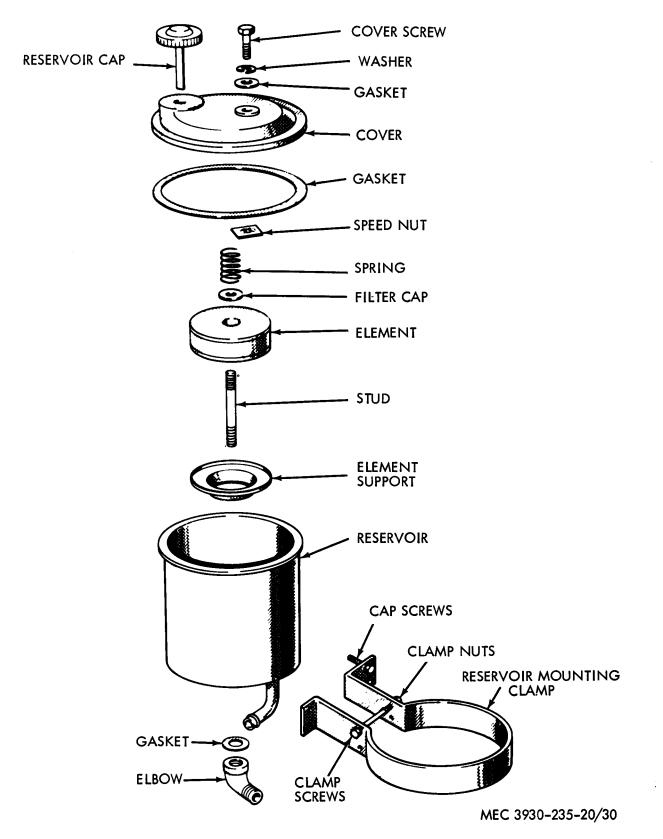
Power steering hydraulic oil reservoir, exploded view.
